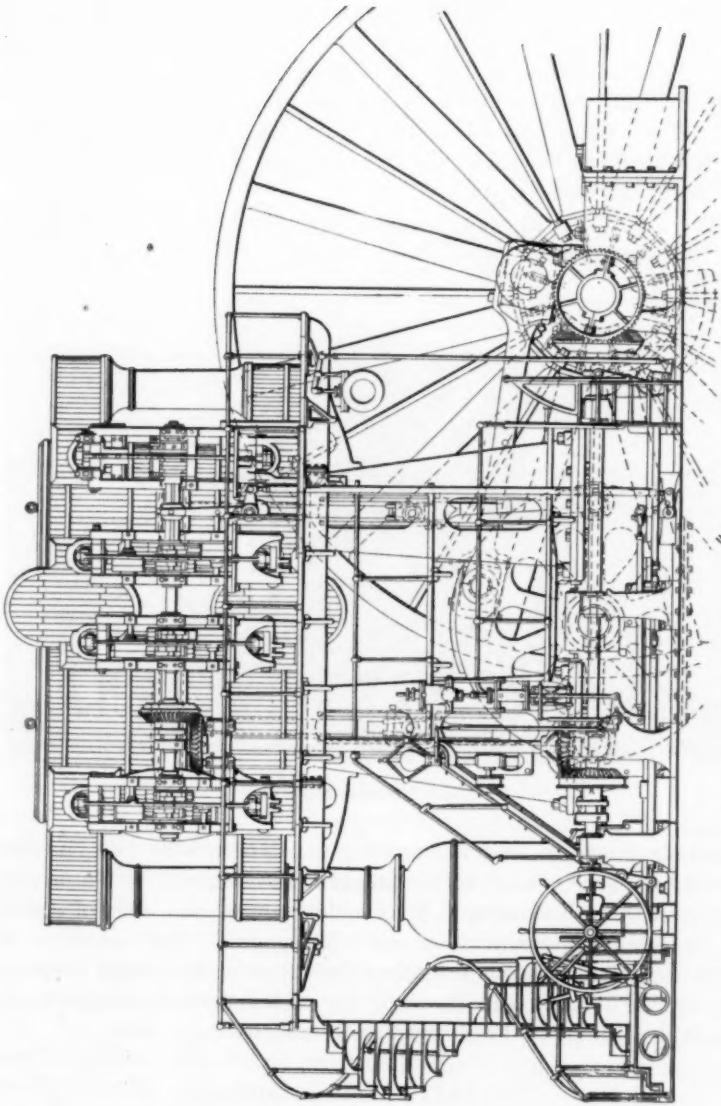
HOISTING AND COMPRESSOR ENGINE *Superior
